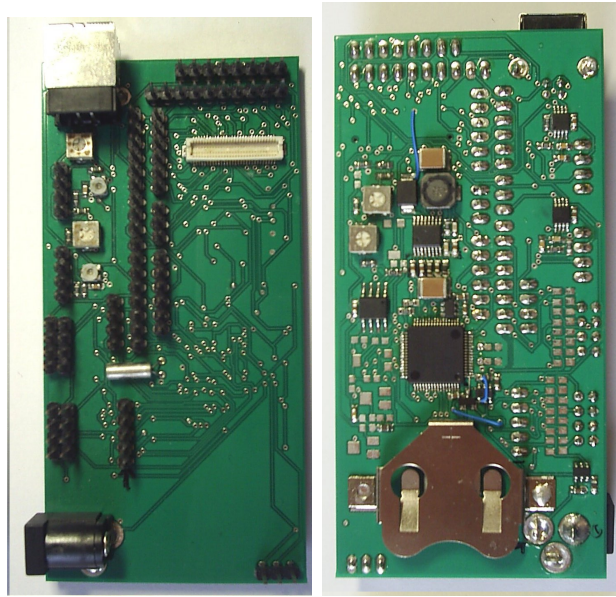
The new Gumsense PCB top (left) and bottom (right). Actual dimensions are 95 by 47 mm.
